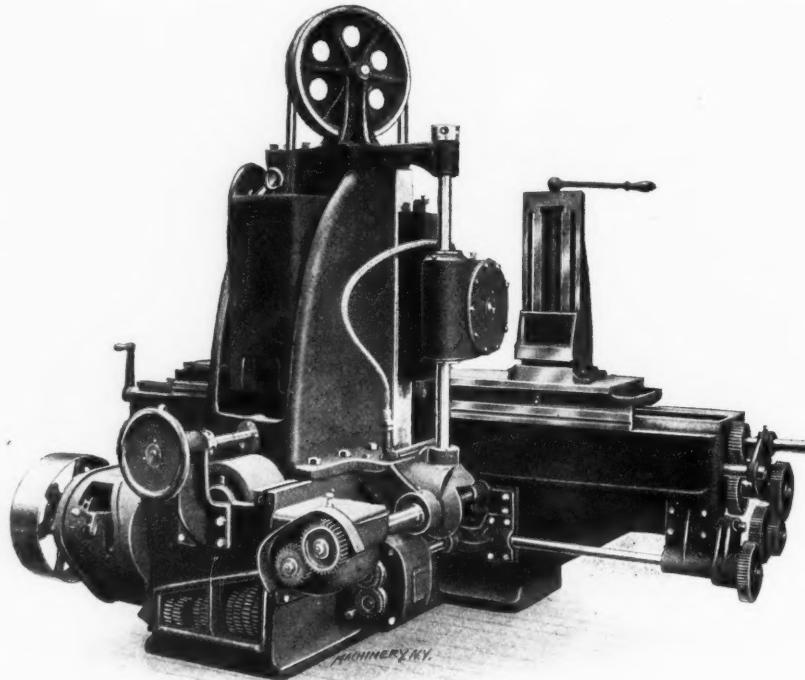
Rear View of the Machine, showing Single-speed Drive, Quick-change Gear Feed, Indexing Mechanism, etc.
